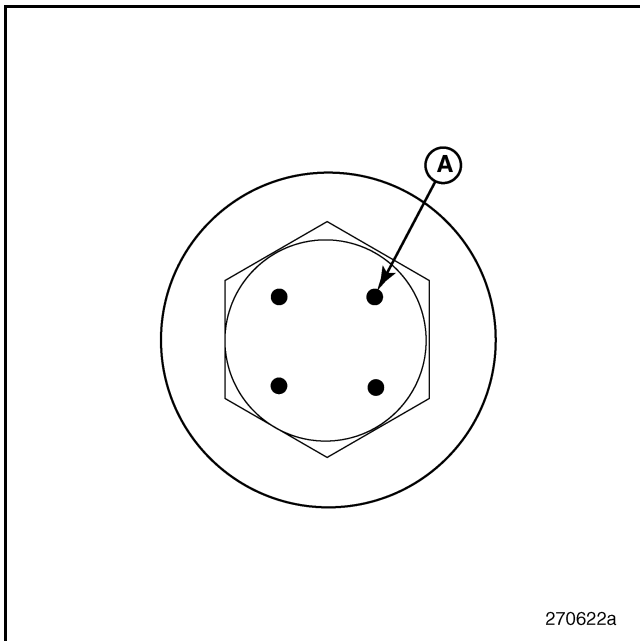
Connecting Rod Screw with Maximum Punch Marks (Replace)
